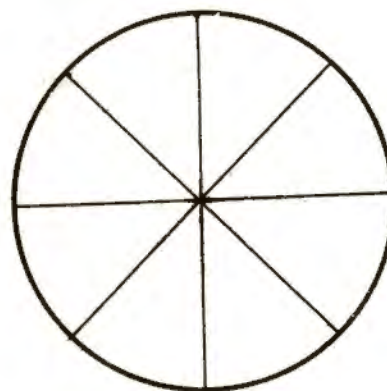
(Bottom Ring with welded spokes)
